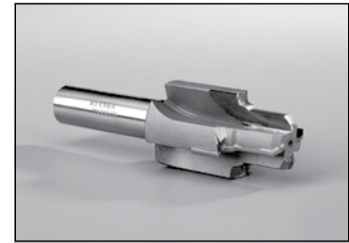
ISO 6149-1 Straight Thread Port Counterboring Tool — Small Spotface
